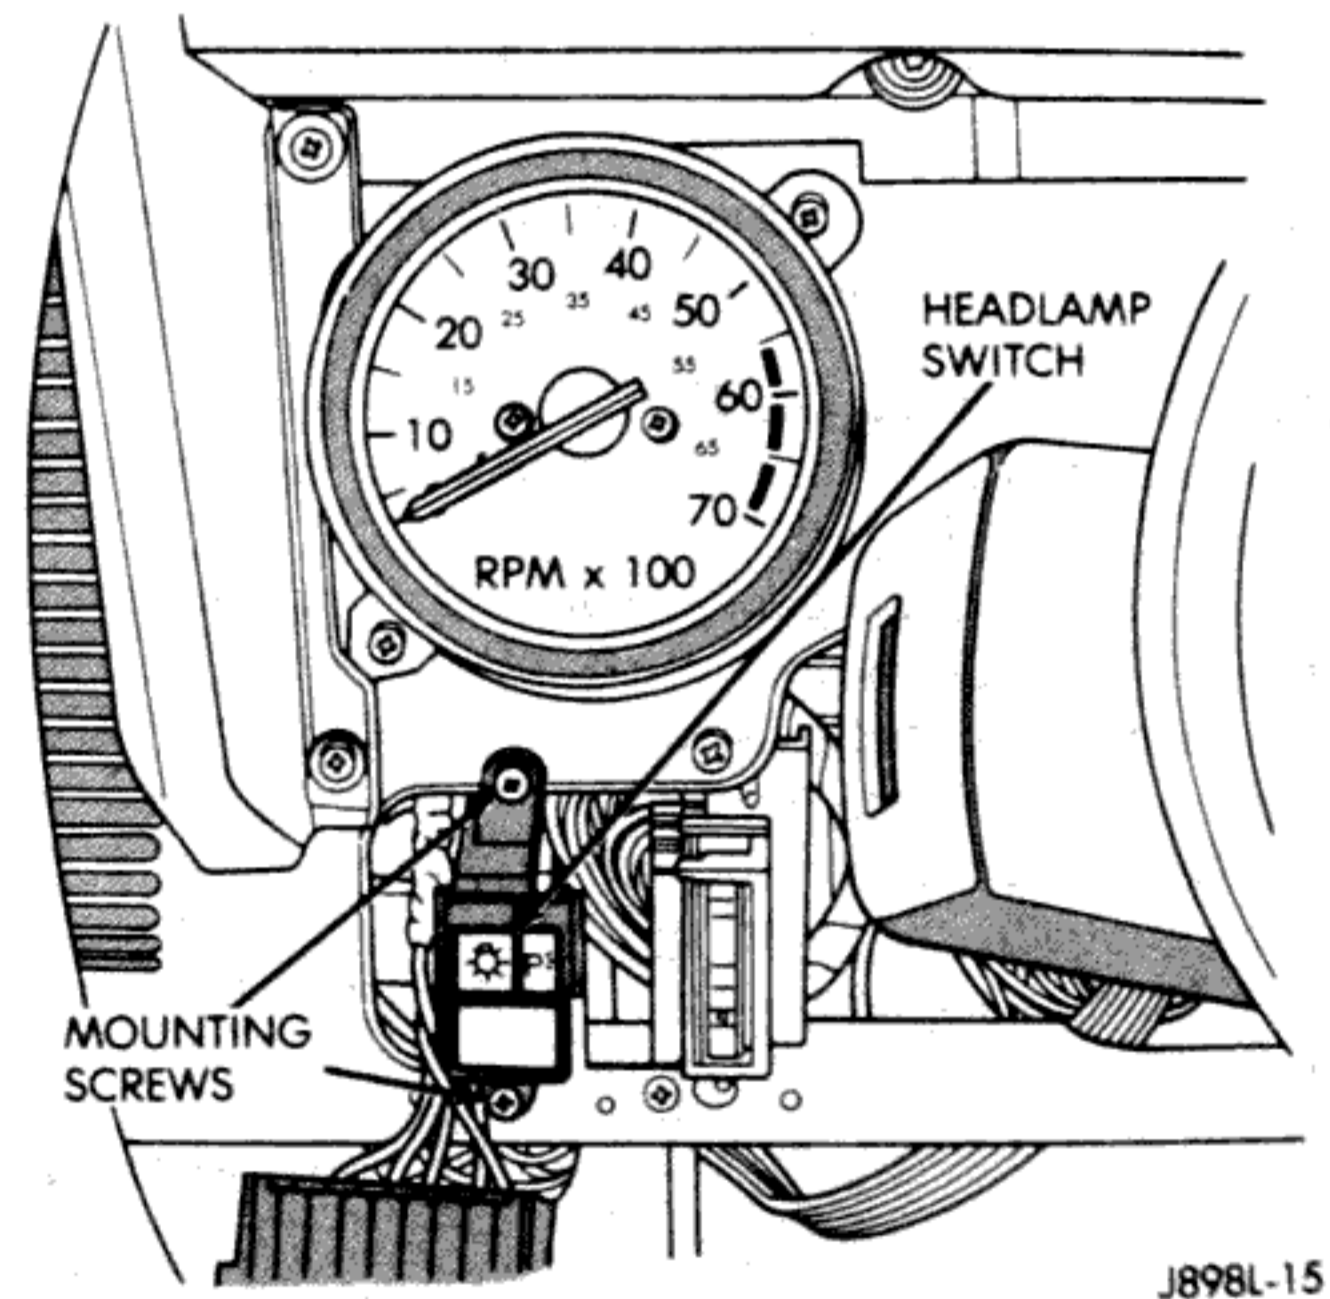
Headlamp/Panel Dimmer Switch Remove/Install
